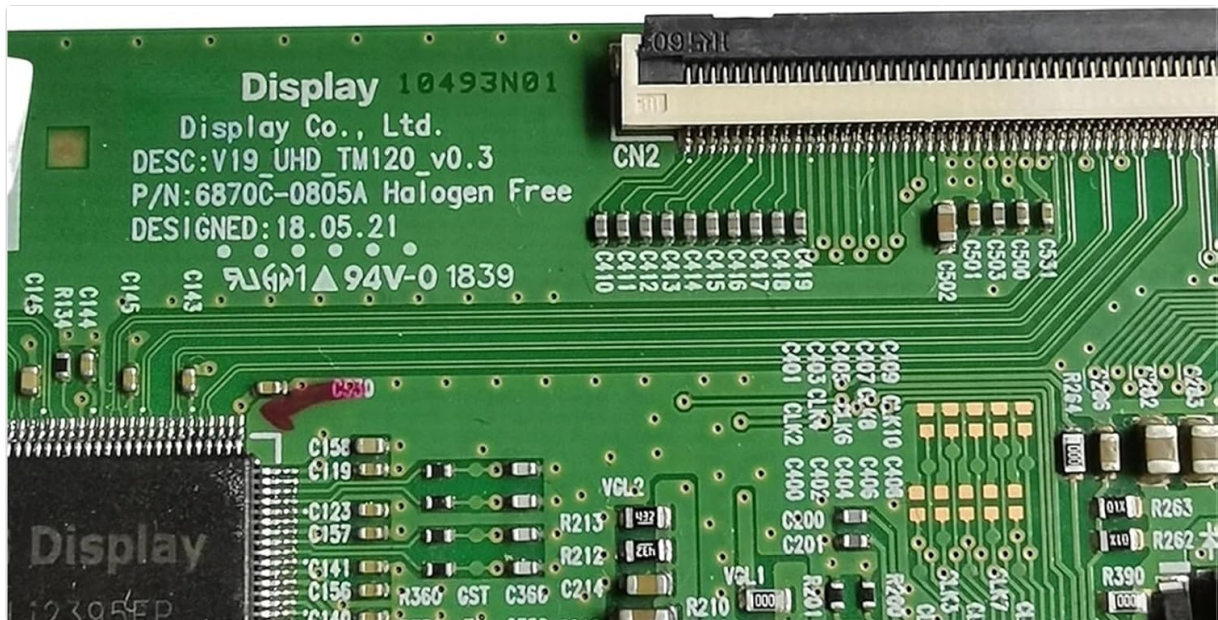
Top view of the 6870C-0805A T-CON board, illustrating the layout of the main LG Display chip, capacitors, resistors, and connectors. This view helps in identifying the board and its primary components during installation.
